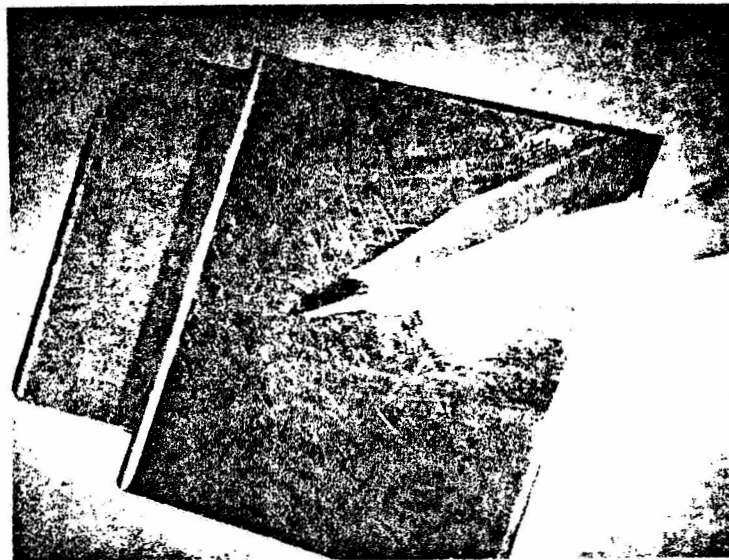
Chrome-plated steel Ultrapulse-welded to bare steel. The weld location is beneath the pencil tip.
